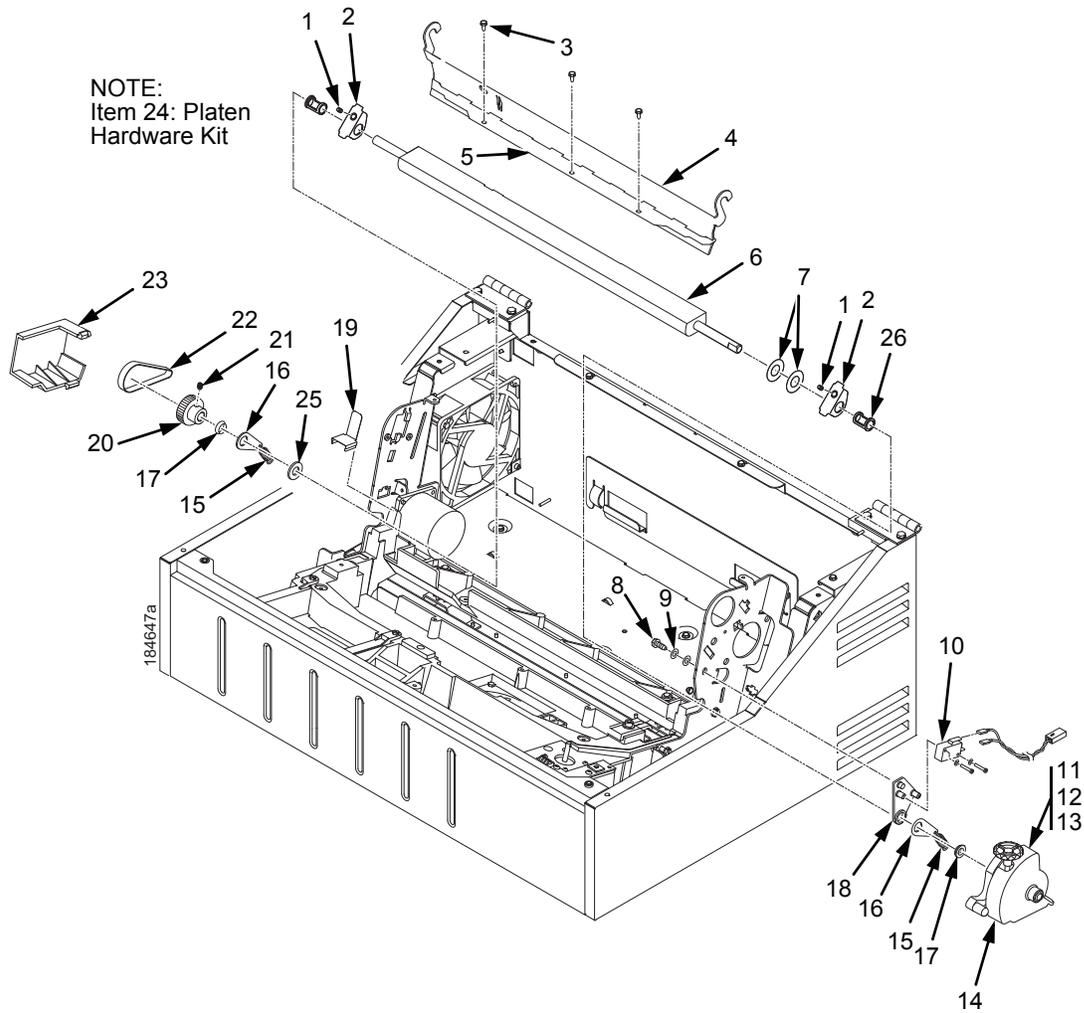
ZTP Platen and Integrated Print Management Sensor Assembly
